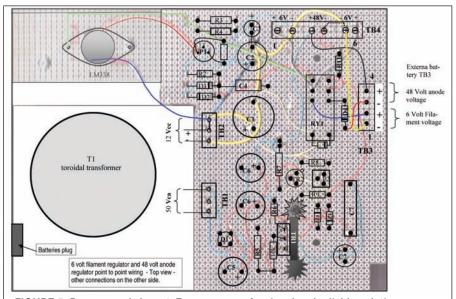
Power supply layout. For a more professional and reliable solution, DIYers capable of doing it can develop a PC board to host all power supply components instead of a "multi-holes" board as I did.
